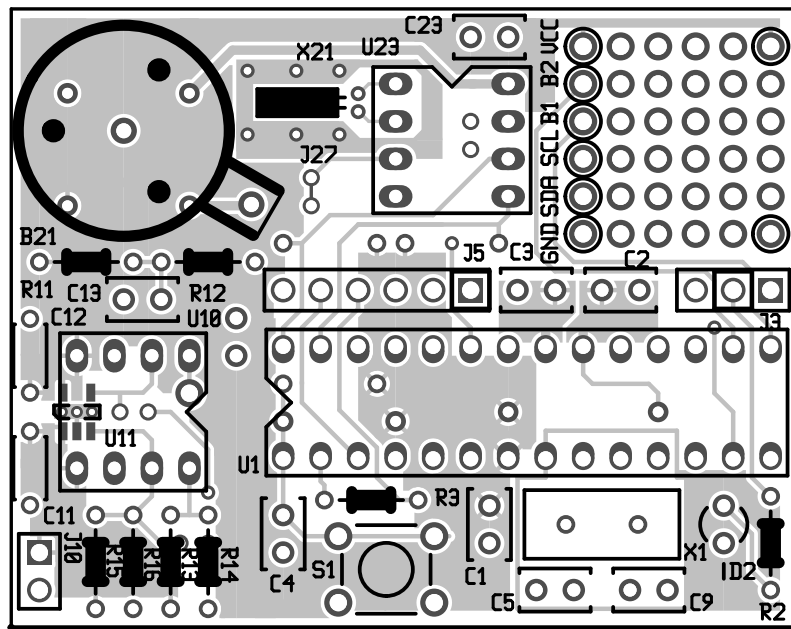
PICO1TRCL Top Side Assembly Drawing (Rev 1)
